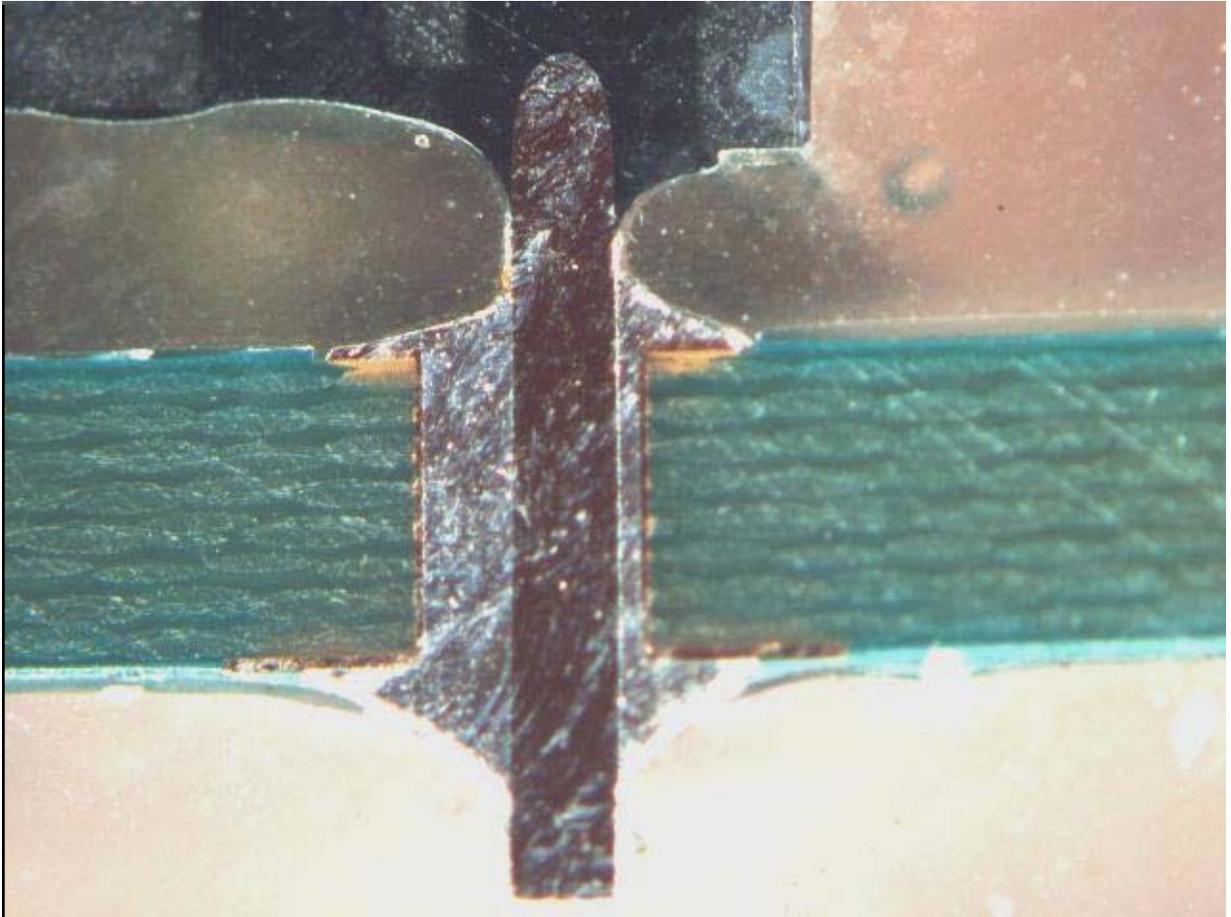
, K222, pin 3. The top of the solder joint shows good wetting to the pin. The plastic flash does not interfere with the formation of a good solder joint.
